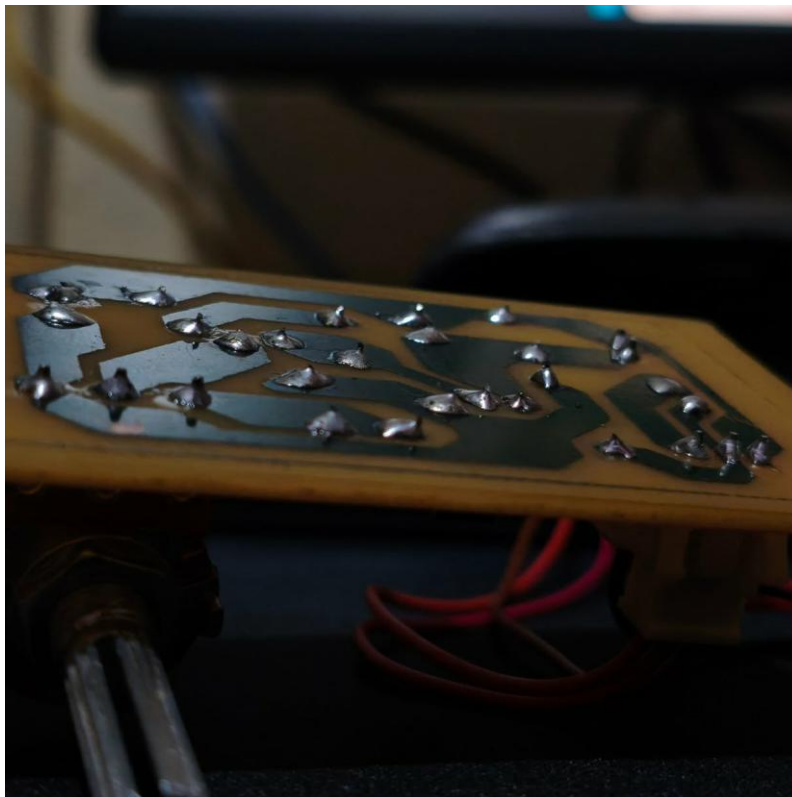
Fabricated PCB after etching and soldering viewed from the copper side.
